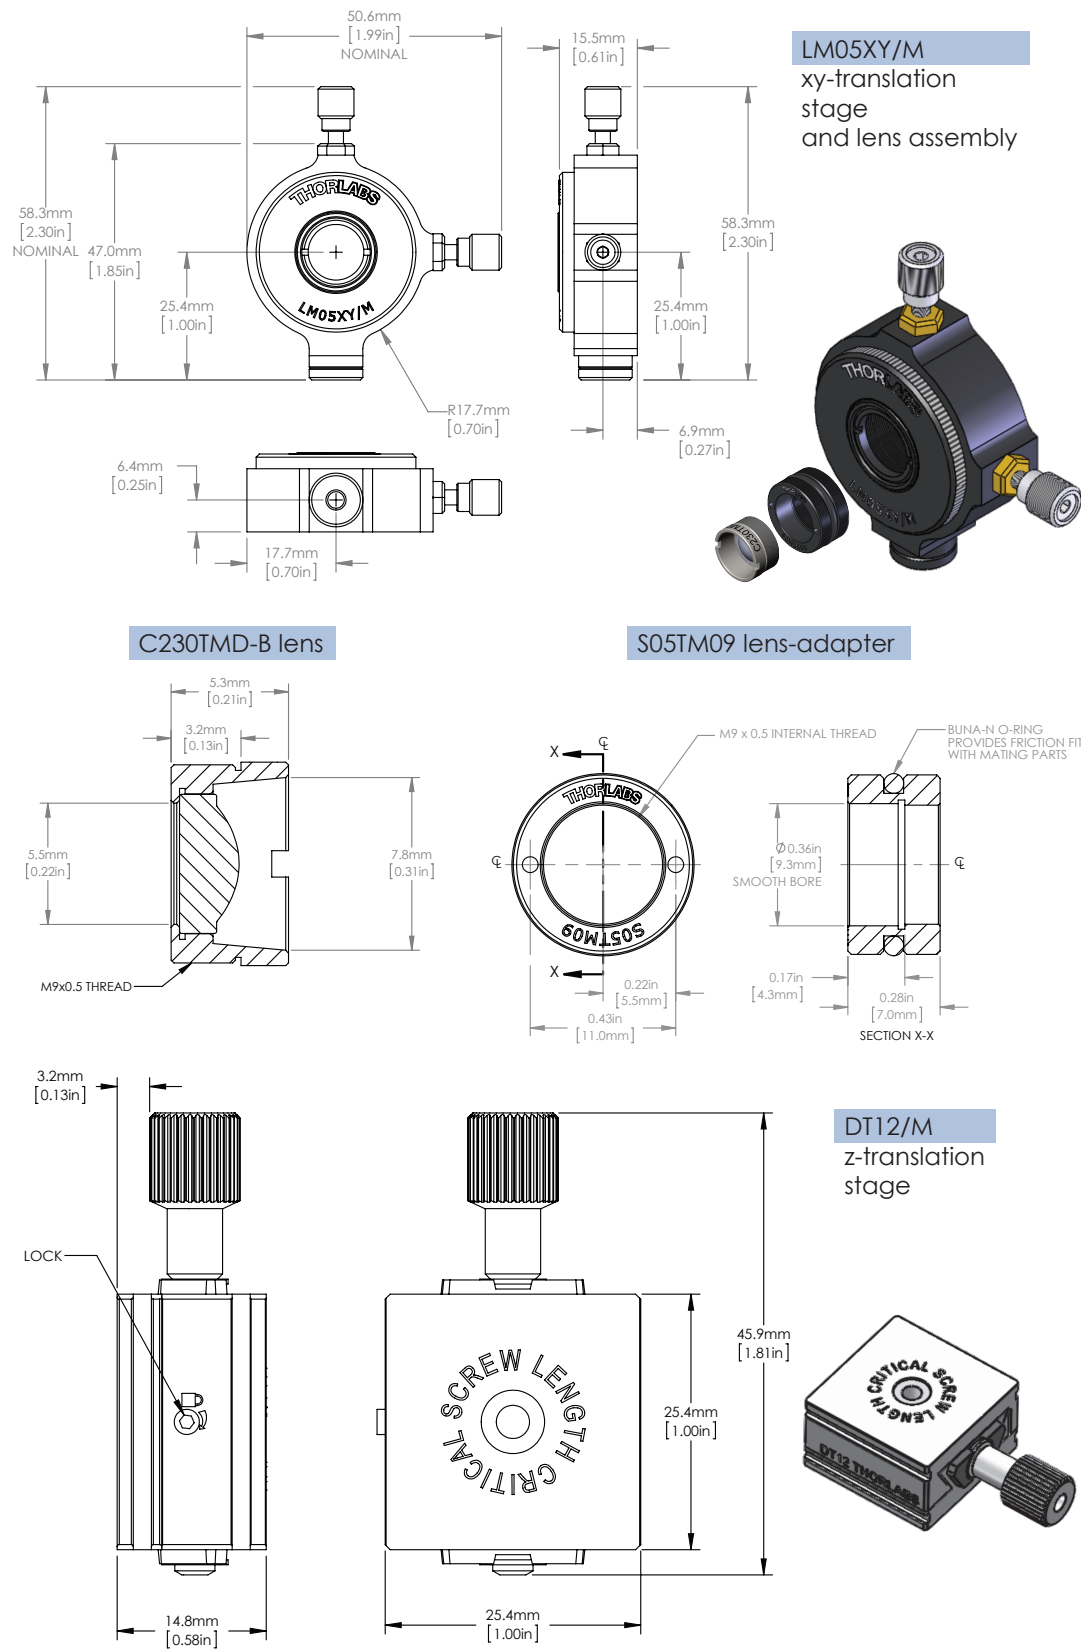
Dimensions and technical drawings of the included Thorlabs parts used in the proposed TA setup. Images and drawings are taken from www.thorlabs.com.
